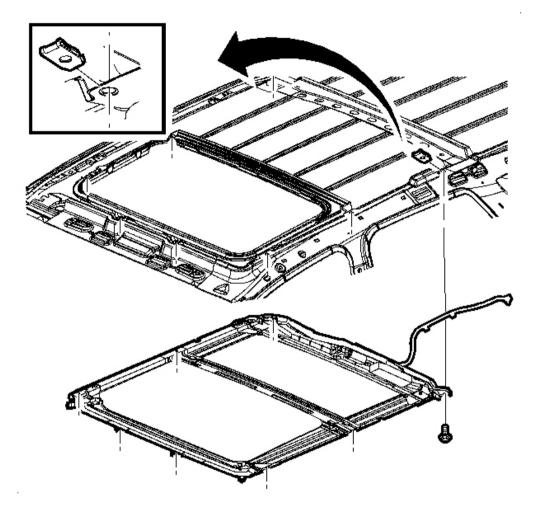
View Of Sunroof Module Assembly Courtesy of GENERAL MOTORS CORP.
